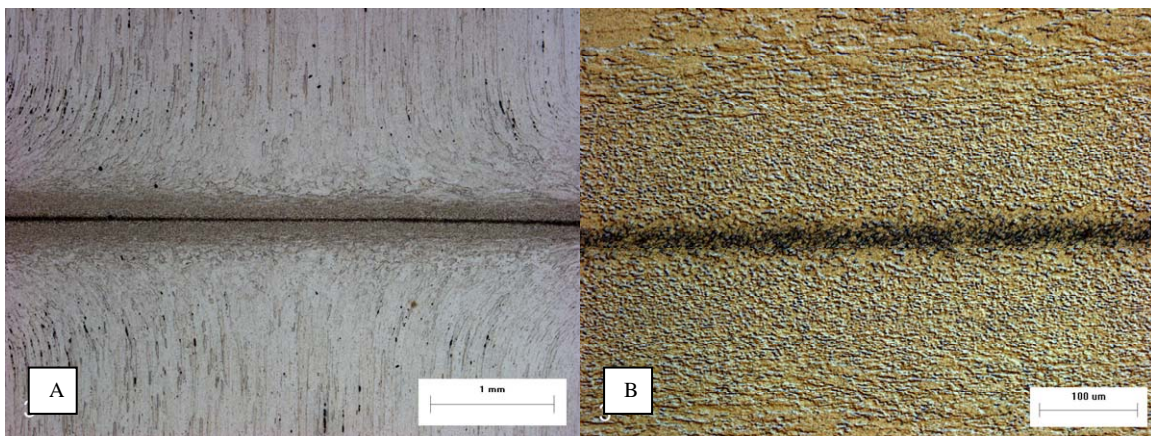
Macroscopic (A) and Microscopic (B) View of Weld Joint Produced with Low Thrust Force during Inertia Welding
